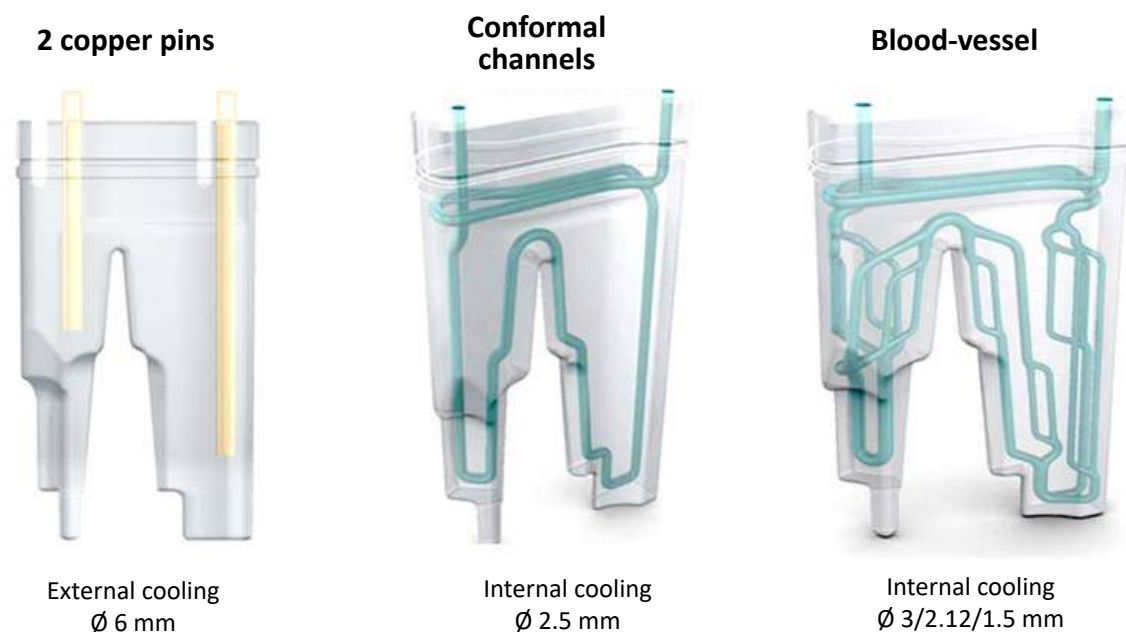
Possible cooling concepts for an injection moulding tool insert (Courtesy University of Leoben)
